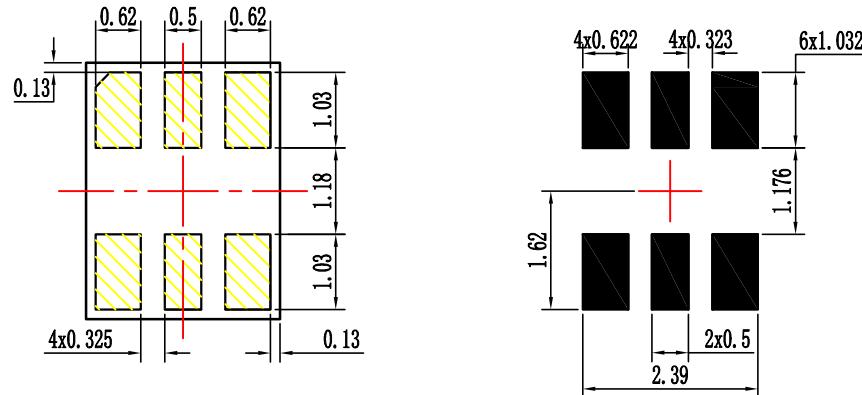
PCB Layout Pattern (Left), Solder Paste Stencil Pattern (Right)
